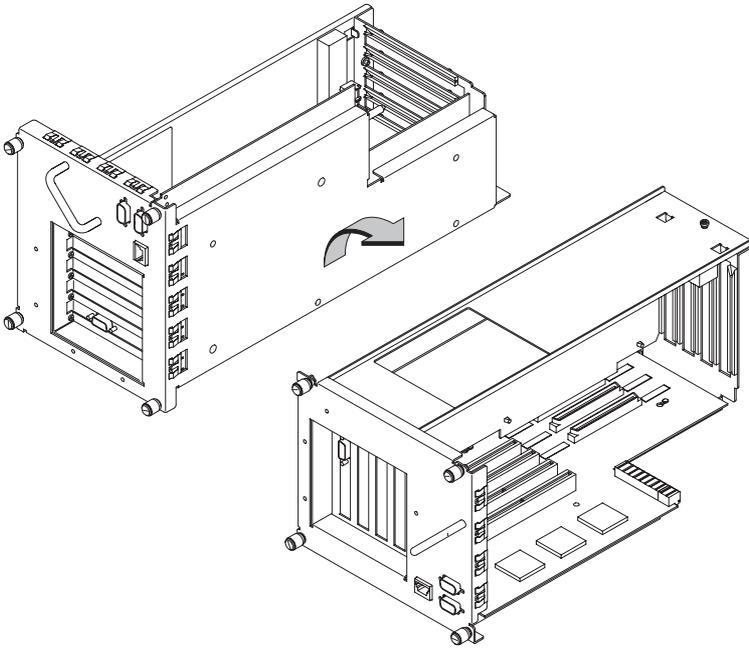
Rotating the EISA Assembly for Option Board Access
